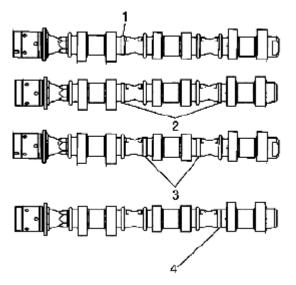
Identifying Camshaft Sealing Rings Courtesy of SUZUKI OF AMERICA CORP.
